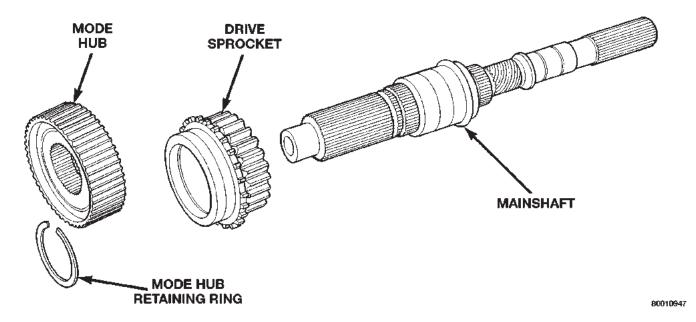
Mainshaft, Mode Hub, And Drive Sprocket
